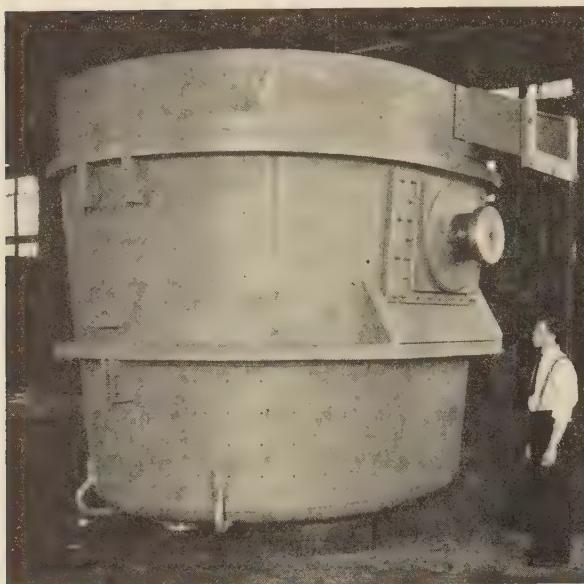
WELDED AND RIVETED STEEL-MILL LADLES
